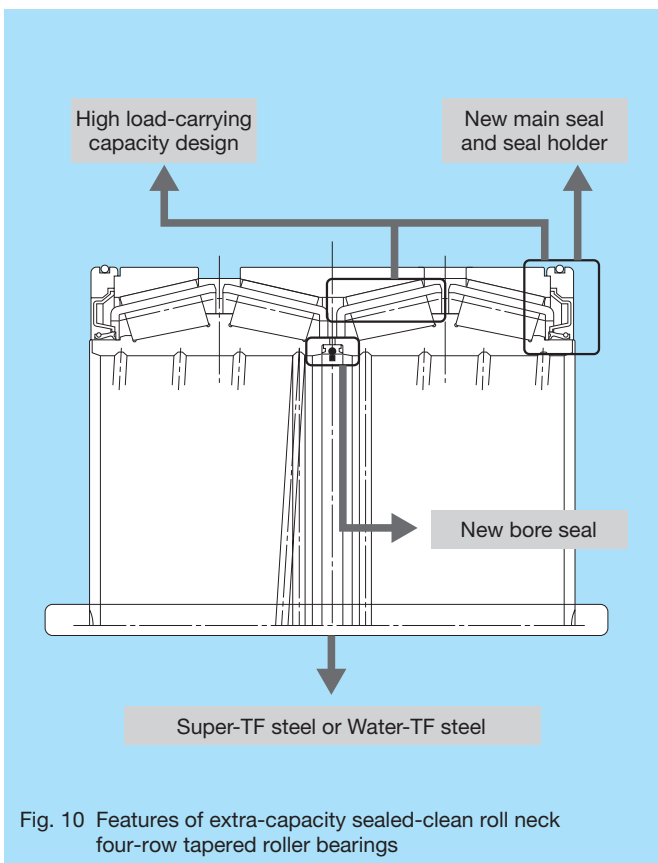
Features of extra-capacity sealed-clean roll neck four-row tapered roller bearings
